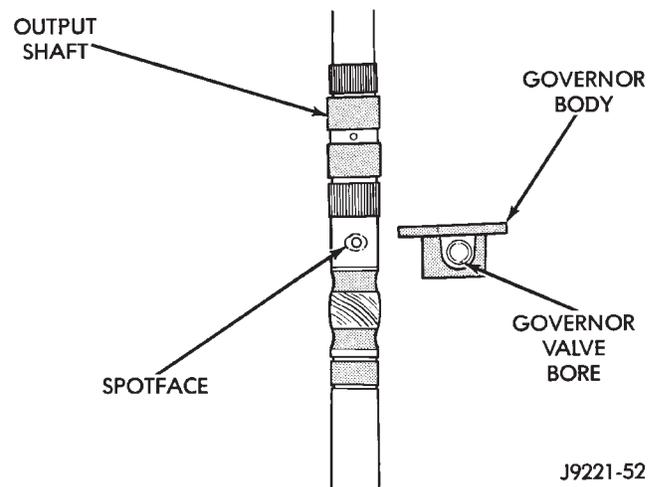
Governor Valve And Output Shaft Spotface Alignment
